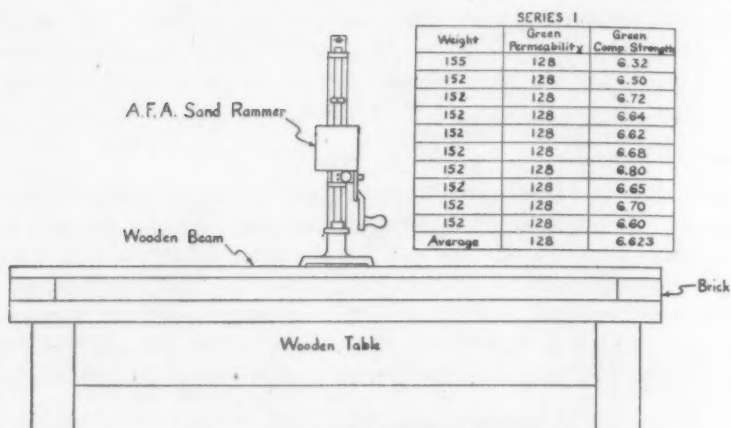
A.F.A. SAND RAMMER MOUNTED ON WOODEN BEAM.
